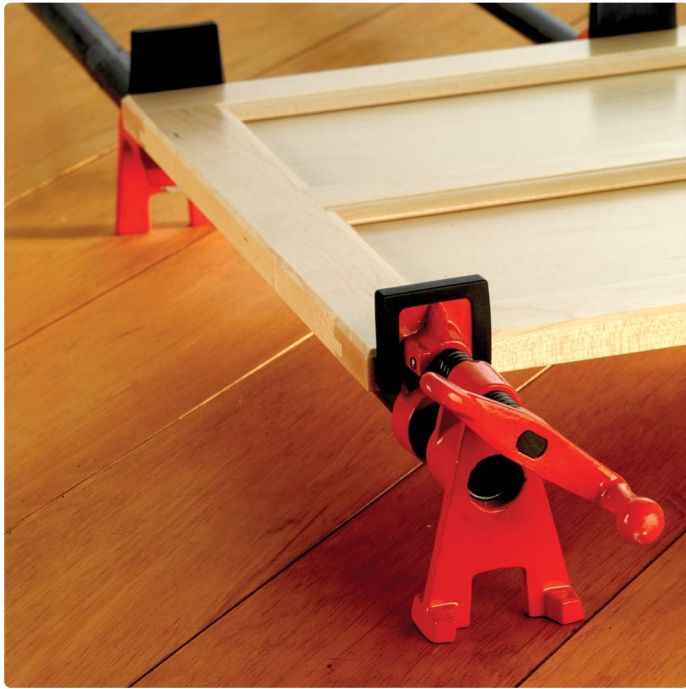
Detailed view of the clamp head, highlighting the large crank handle, Acme threaded spindle, and protective soft jaw caps.
